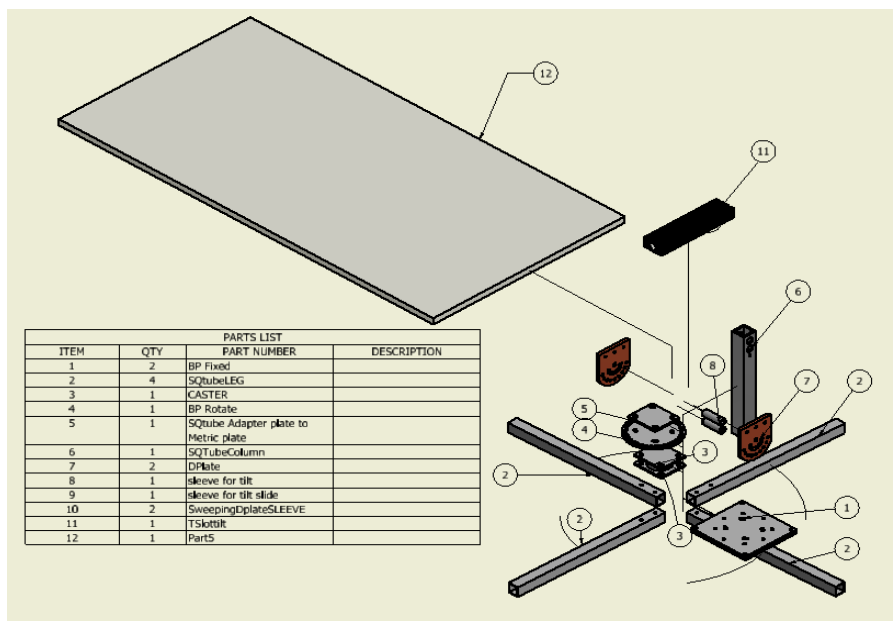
Parts draft and list. Parts draft and list generated by Inventor Autodesk.
